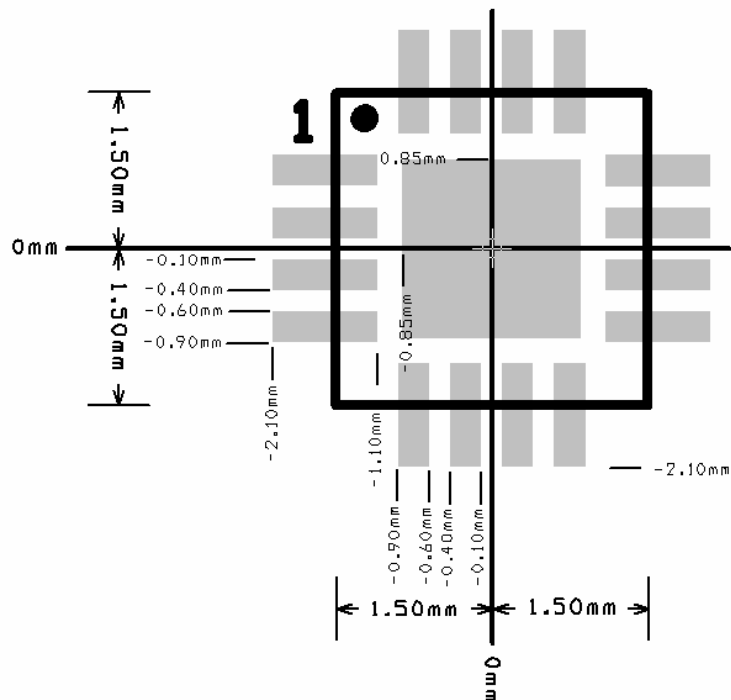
SP7680EB 16 Pin 3x3 DFN Foot Print Dimension
